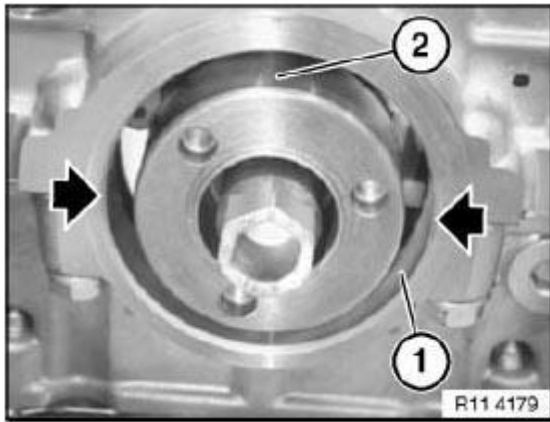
Identifying Sealing Surface And Crankshaft Radial Seal Running Surface
